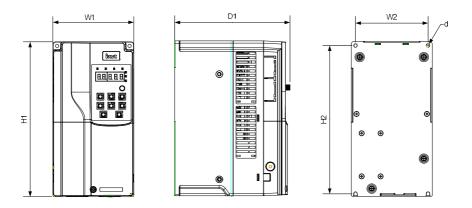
11–45kW VFD wall-mounting diagram Table C-1 1.5–45kW VFD wall-mounting dimensions (unit: mm)
